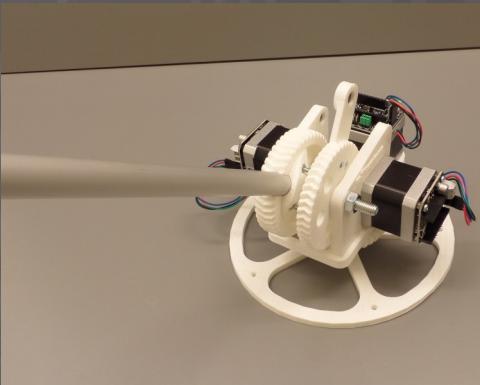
If mounted correctly, the motors and gears should run smooth without any slack.
